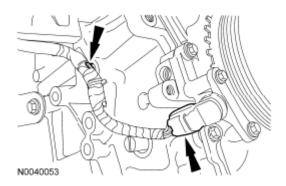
Locating CKP Sensor Electrical Connector And Wiring Harness Pin-Type Retainer Courtesy of FORD MOTOR CO.
